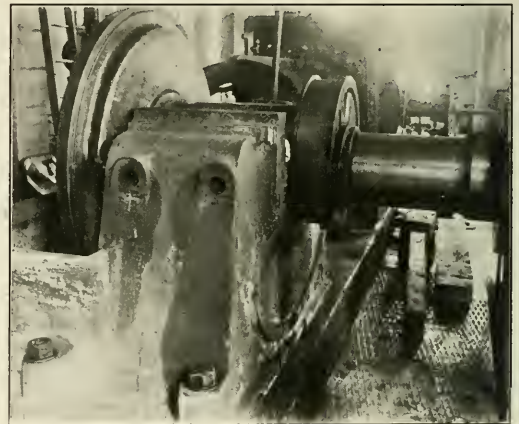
Welded 7-Ton Air Compressor Casting
